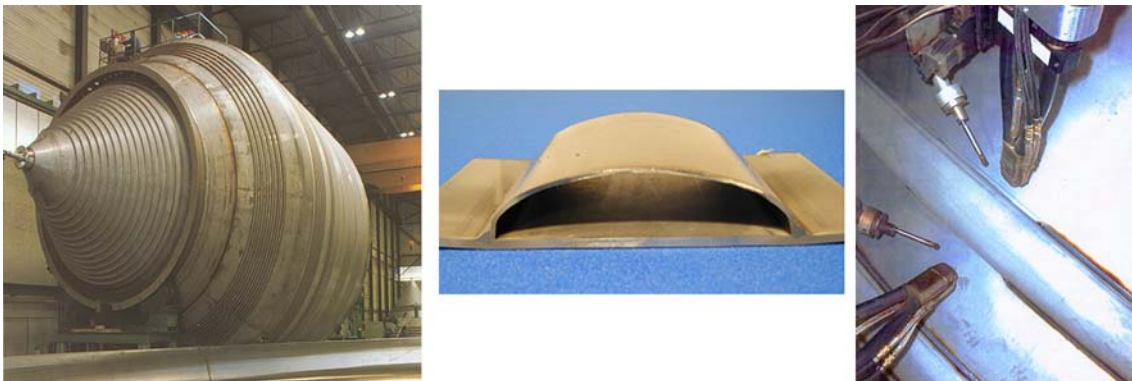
Tandem welding of stainless steel boiler with CrNi filler wire.
